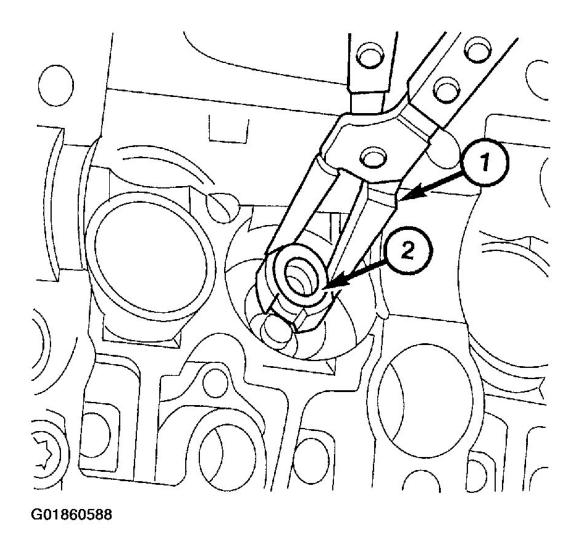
Removing Valve Stem Seal Courtesy of DAIMLERCHRYSLER CORP.
